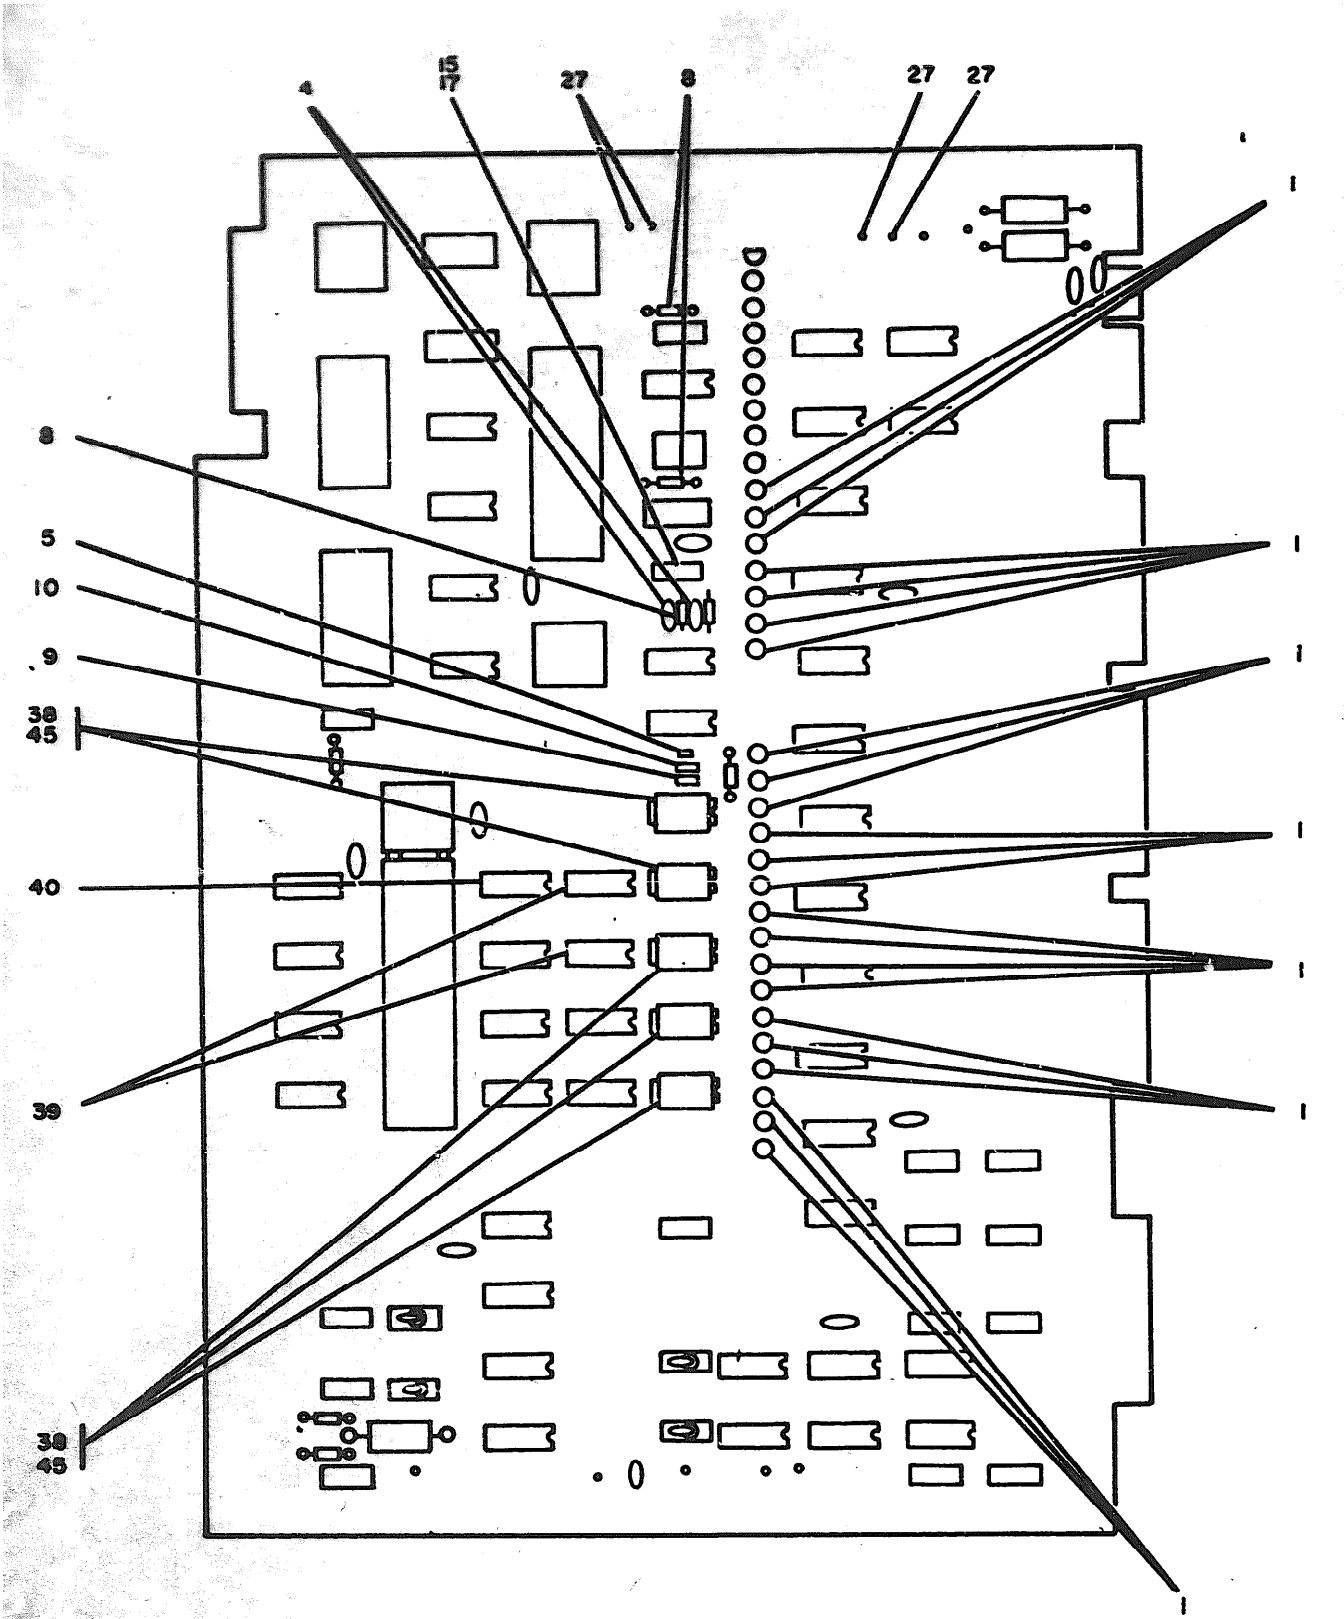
Control Circuit Card Assembly (Sheet 2 of 2)
